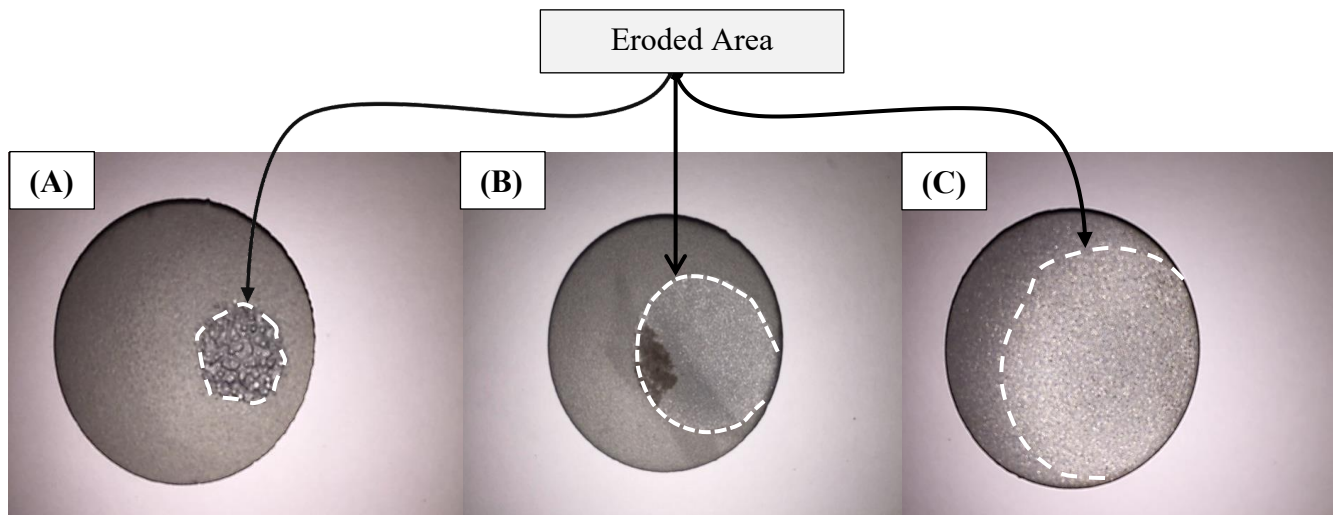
Optical photographs of the samples showing the eroded area for (A) nWC-12Co coating, (B) Mixed Coating and (C) Un-coated workpiece.
